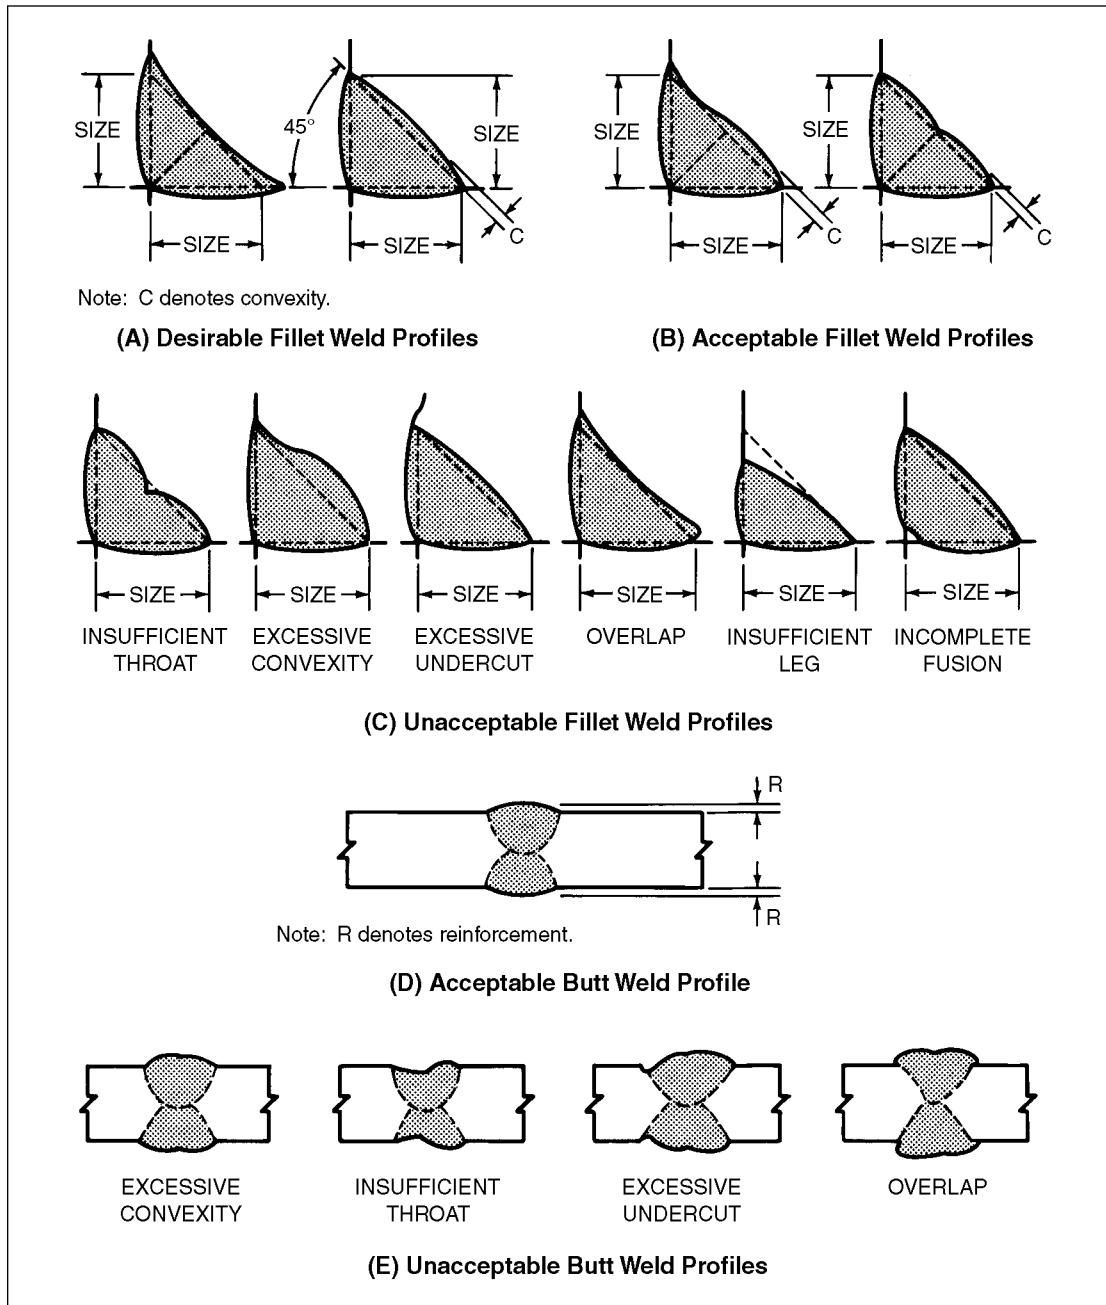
Weld Profiles of Acceptable and Unacceptable Surface Conditions
